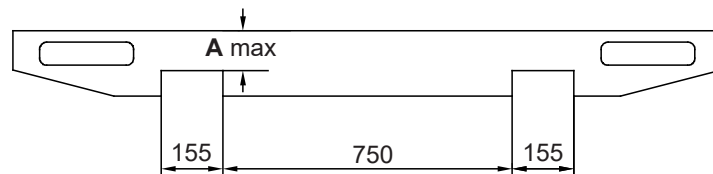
Z-45-110, Z-75-110, Z-45-90, Z-75-90 ZU-45-110, ZU-75-110, ZU-45-90, ZU-75-90
